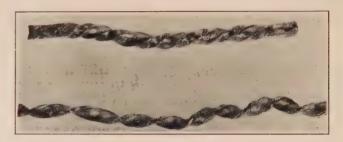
WELD METAL TWISTED WITHOUT FAILURE
